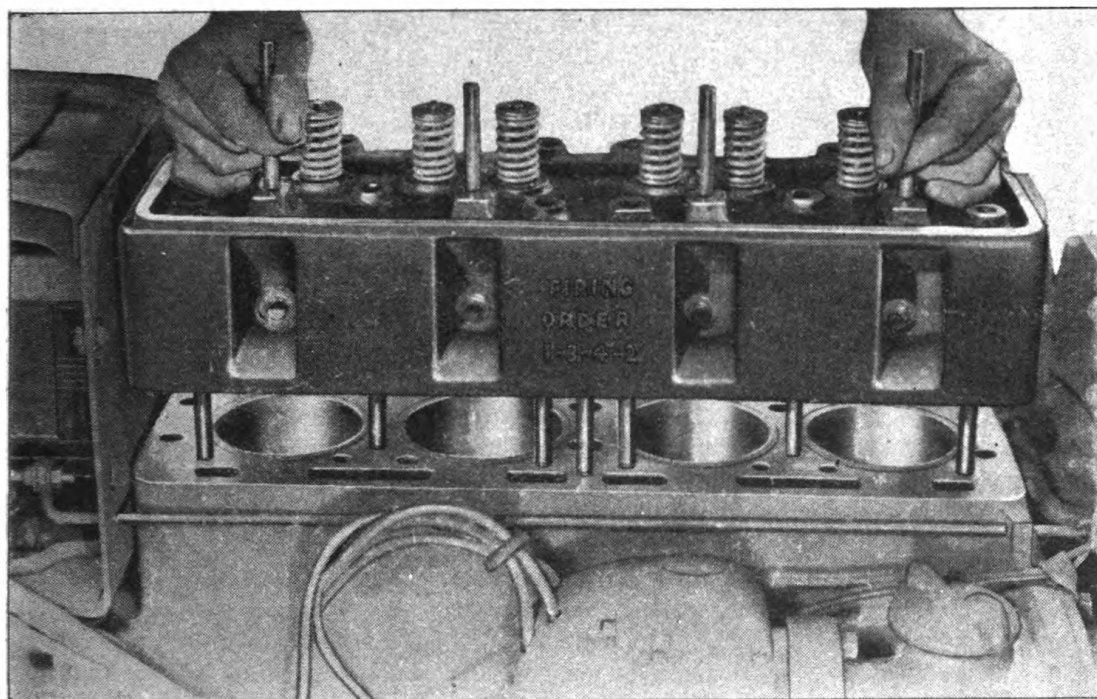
Removing Cylinder Head by Lifting Straight Up
